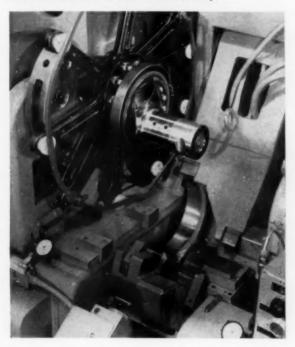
After operations shown in Fig. 5 are completed, the center head is opened to allow assembly of center crankcase and other rod assembly.
